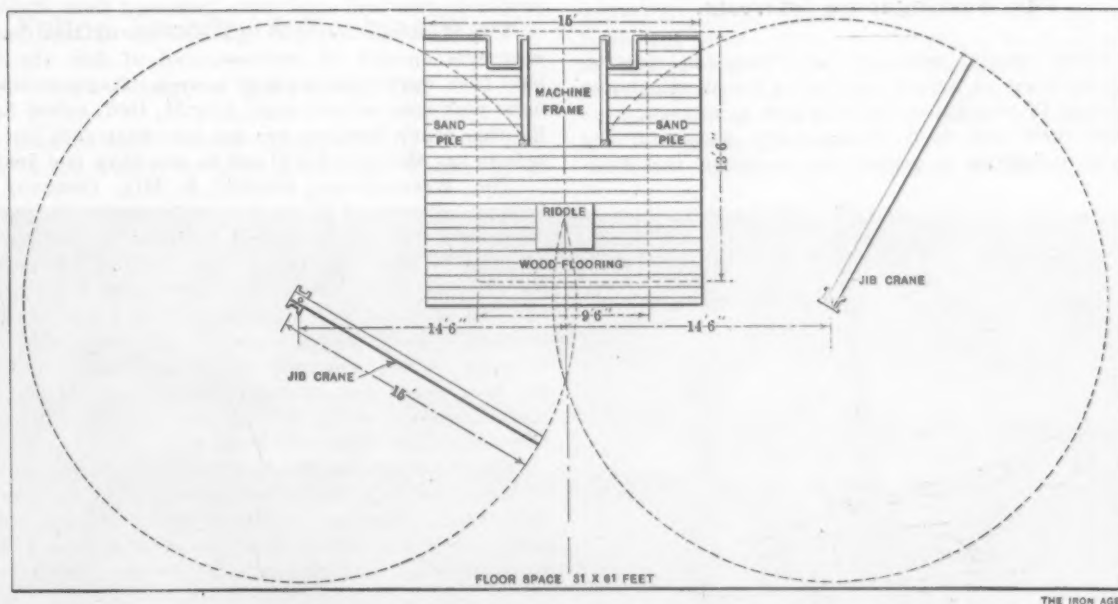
Plan View, Showing Location of Jib Cranes for Handling Molds and Flasks.
